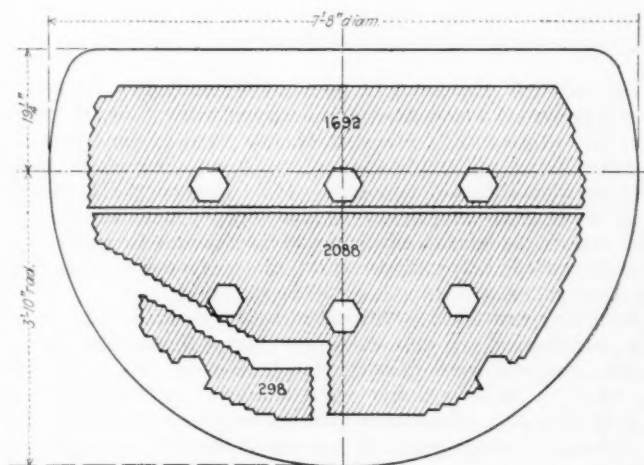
TUBE-SHEET LAYOUT OF 12,000-SQ. FT. SINGLE-PASS CONDENSER, 1924
